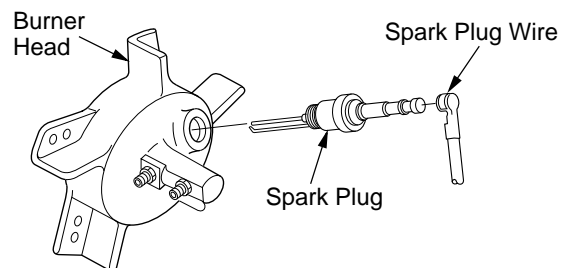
Spark Plug Removal, 70/100/150,000 Btu/Hr Models
